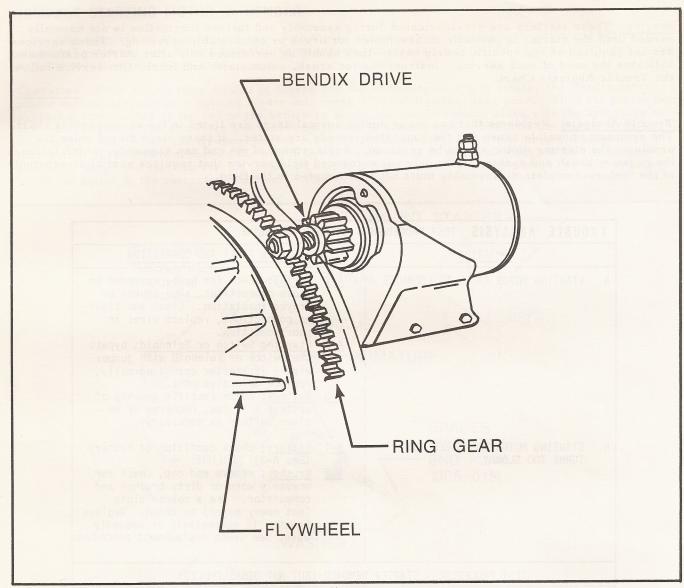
BENDIX DRÍVE, RING GEAR ENGAGEMENT
